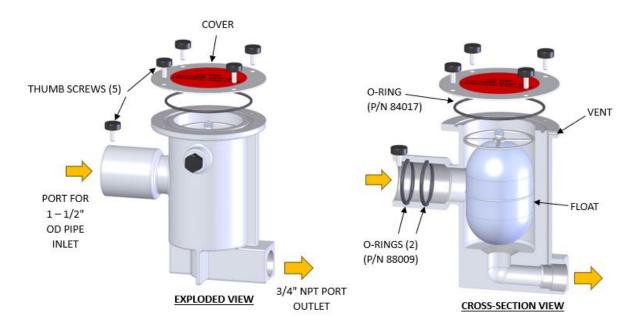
External Condensate Trap - Cross-Section & Exploded View
